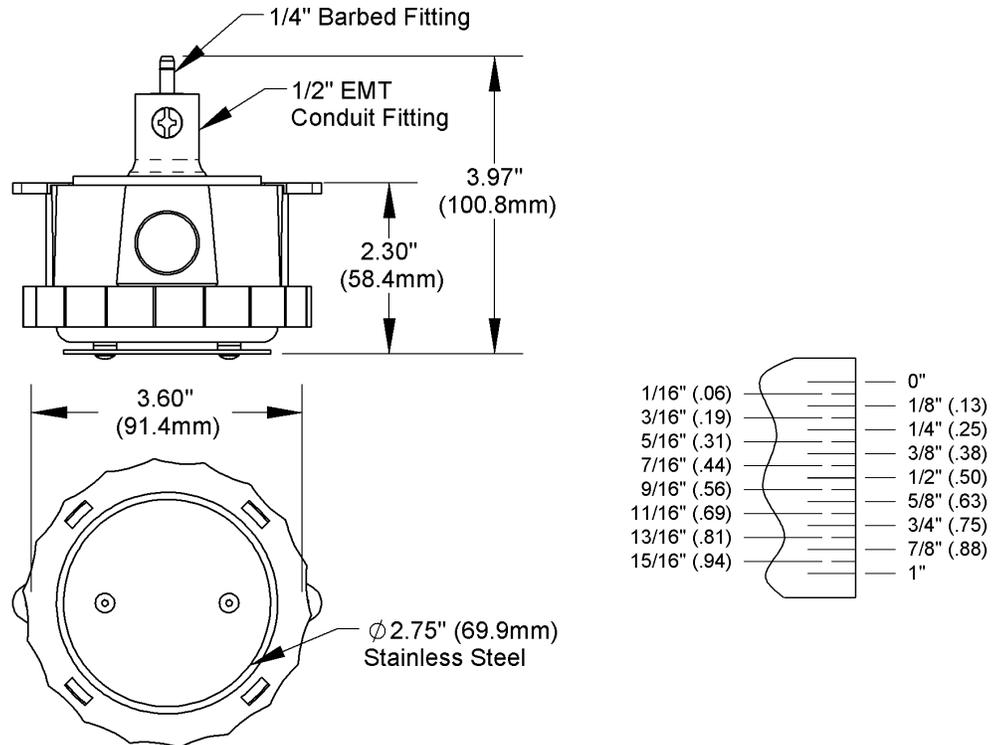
BAPI Outdoor Air Static Pressure Pickup, Vertical Mount
